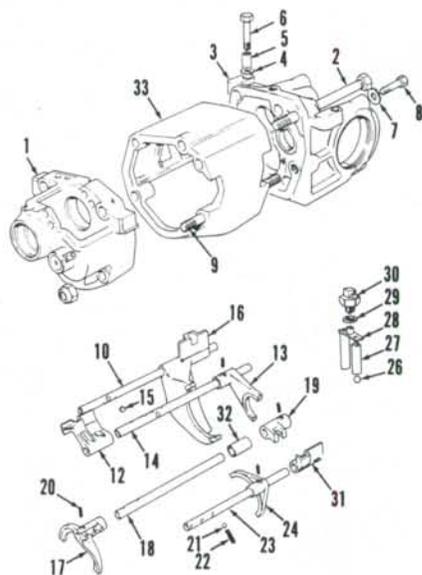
A—Exploded view of end plates, shift rods and shift forks used on 1394, 1490, 1494, 1594 and 1690 models. Refer to Fig. 174 for legend except for the following:
